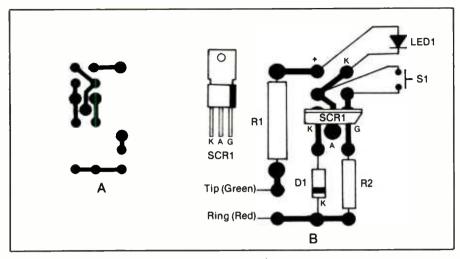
Actual-size etching-and-drilling guide (A) for fabricating a printed-circuit board for the project. No board outline is shown because the dimensions of the board you actually use will depend on available space and mounting conditions inside a particular telephone instrument. Wiring details (B) for on- and offboard components for pc board. Use this as a guide to mounting components and wiring them together if you use perforated board instead of a printedcircuit board.
